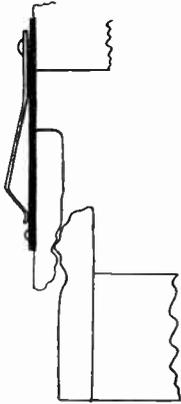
BADLY BURNT ARCING FINGERS. Showing "blobs" of molten metal likely to catch and prevent the breaker opening.
